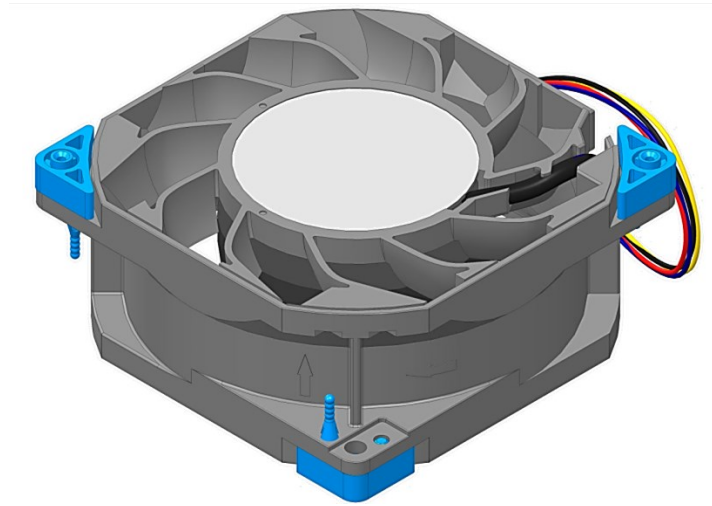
BHM 12000rpm Fan CAD Model Final
